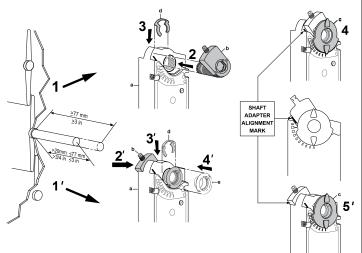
Shaft Adapter Placement for Clockwise Rotation on Short and Long Shafts.
